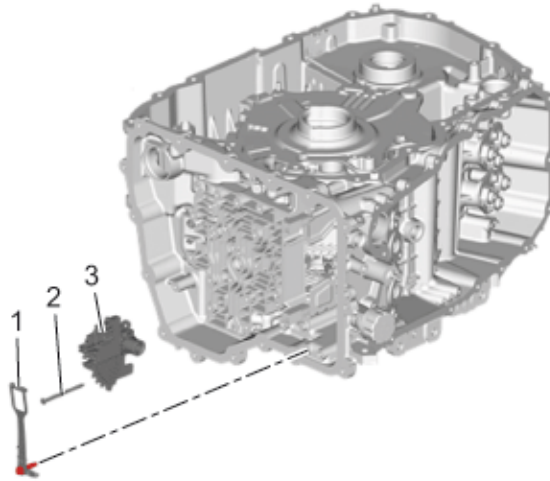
Manual Shift Detent Lever, Spring And Manual Shift Shaft Pin
